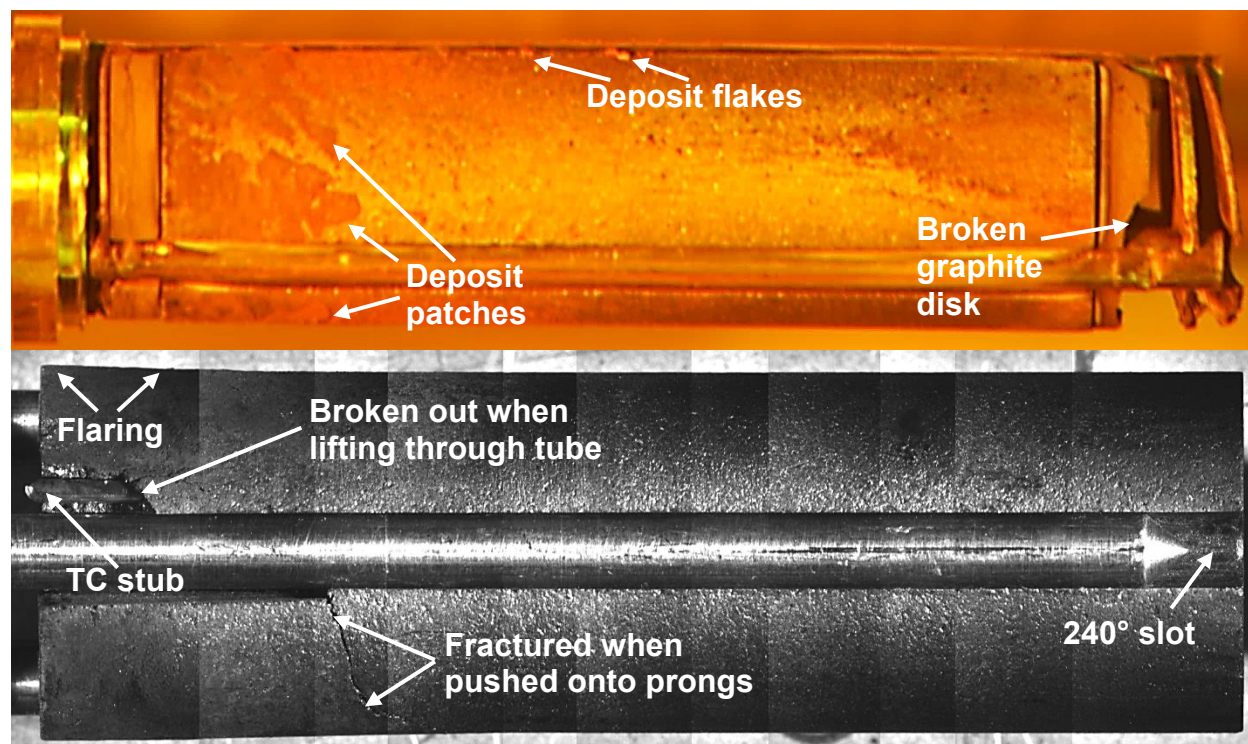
Thick deposit patches (top) and handling fracture on Holder 3, bottom ends on right side.
